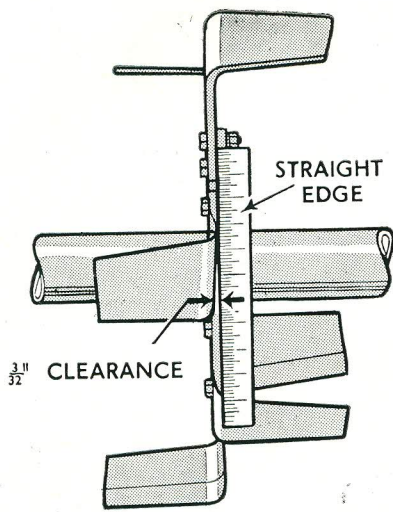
Checking blade alignment with straight edge (or setting bar)
